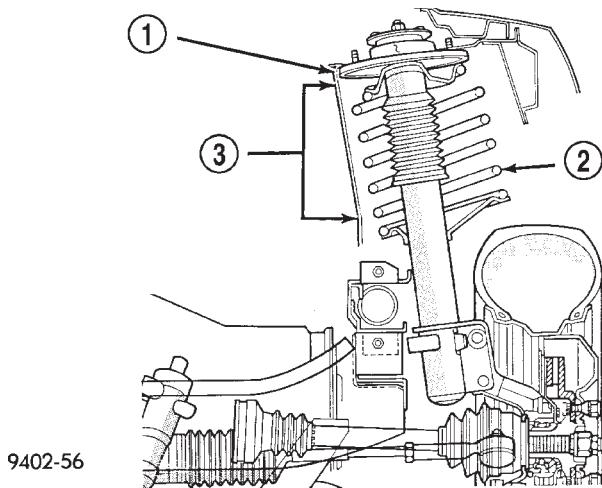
Shock Tower To Spring Minimum Clearance Area
